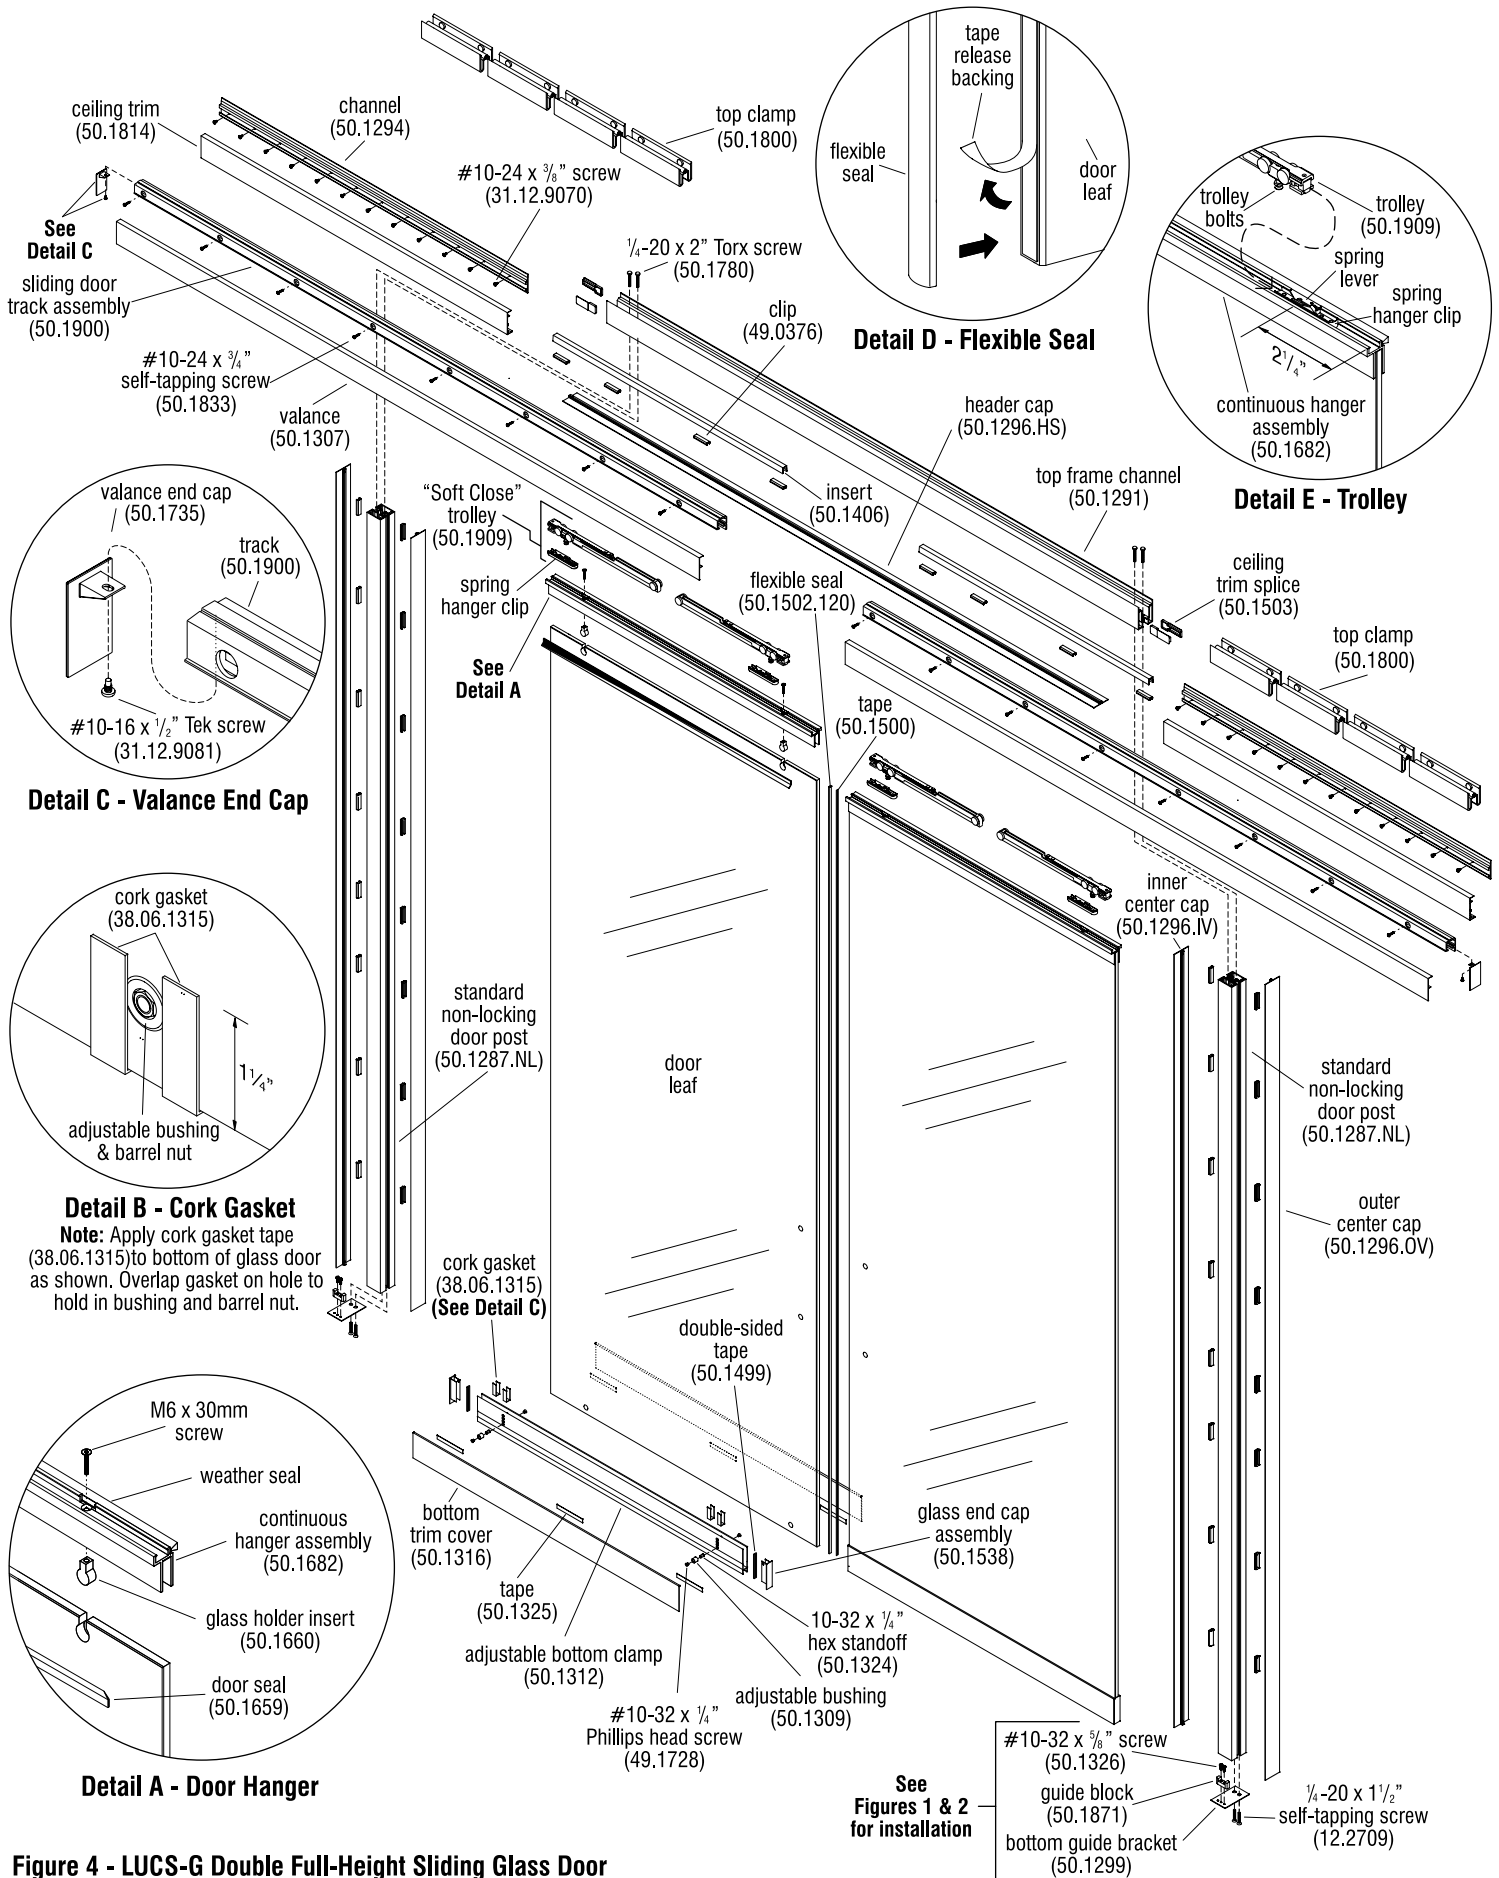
LUCS-G Double Full-Height Sliding Glass Door
